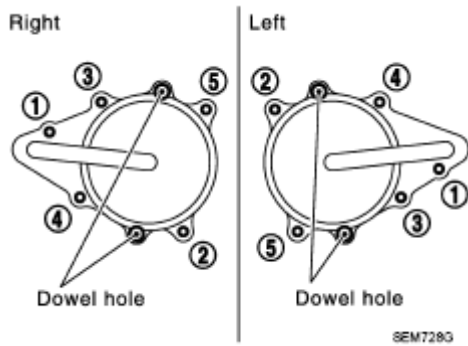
Identifying Intake Valve Timing Control Covers Bolts Loosening Sequence
